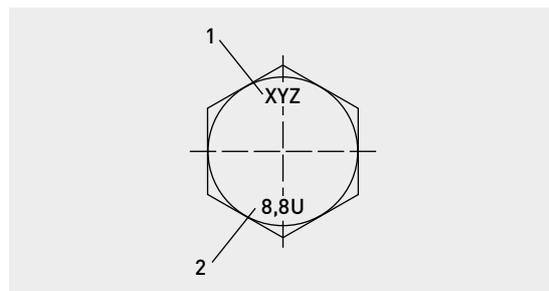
Example of the marking used on hot dip-galvanized bolts and screws with threads undersized to tolerance class 6az before coating
